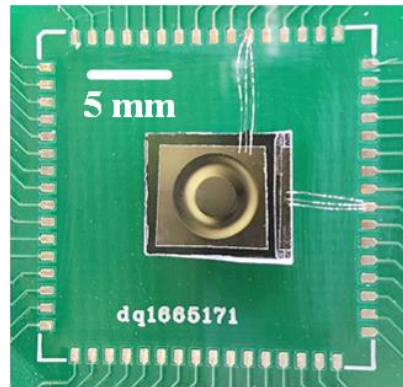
A Photograph of the fabricated annular CMUT mounted and wire-bonded onto a PCB carrier.
